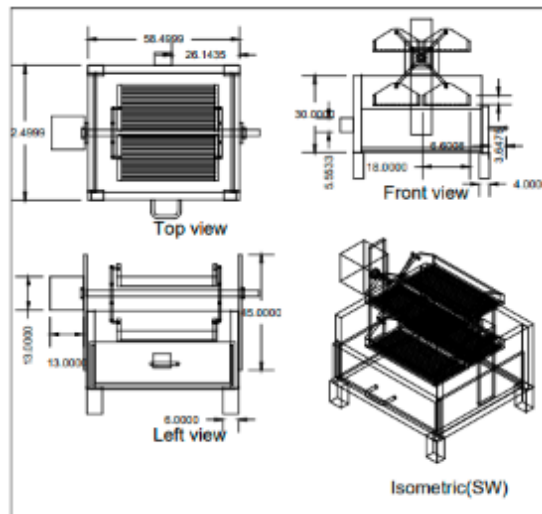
2D Engineering Drawing of the Motorized Chicken Roaster [3]
